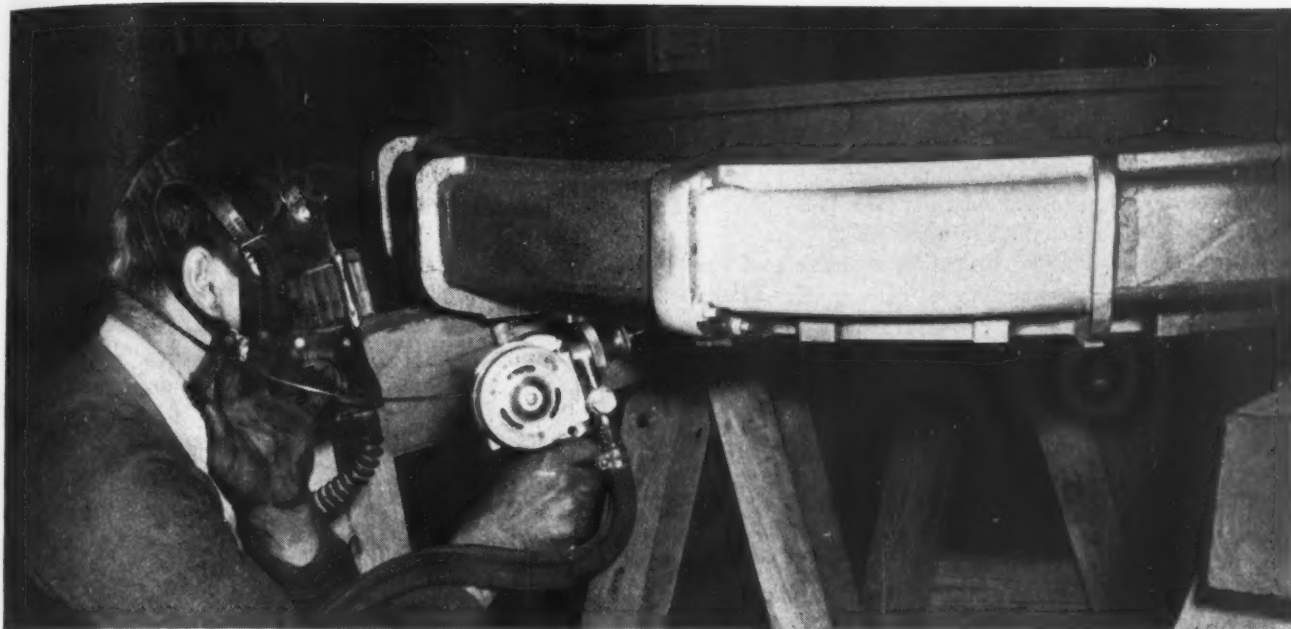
Cast-iron gear shroud of anti-aircraft gun mount being sprayed with zinc to improve corrosion resistance
